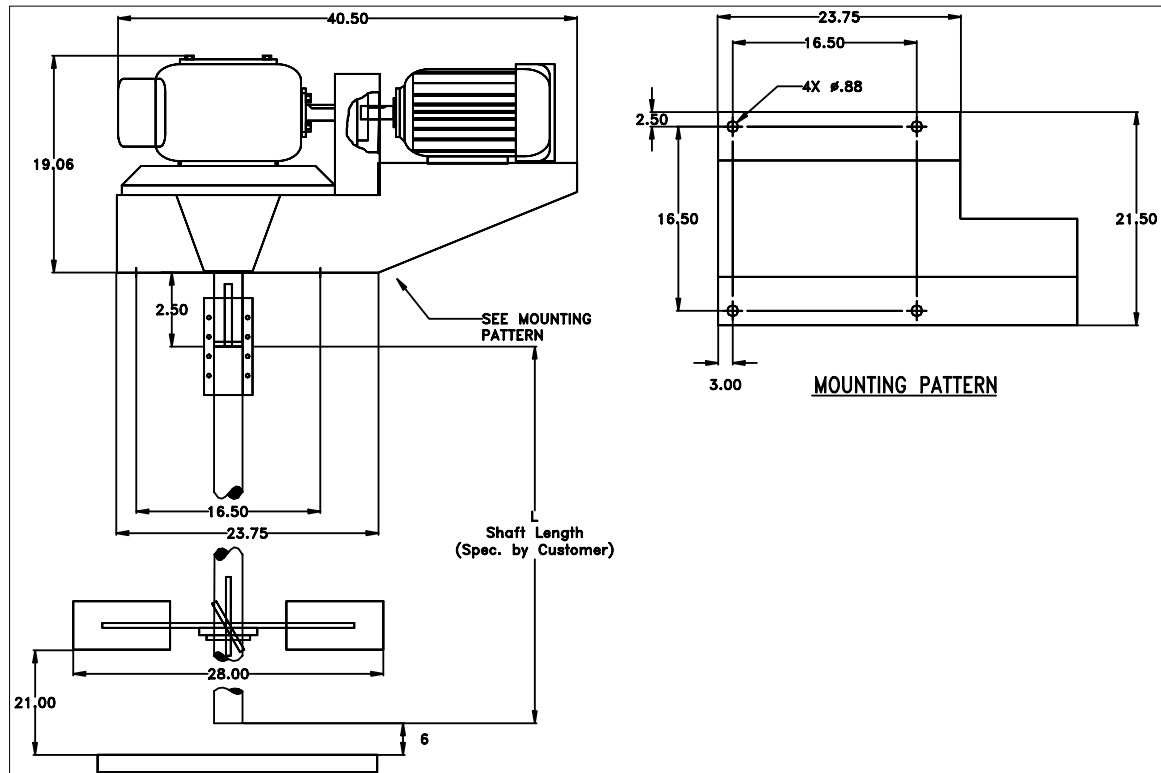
DIMENSIONAL DRAWING MA-5
